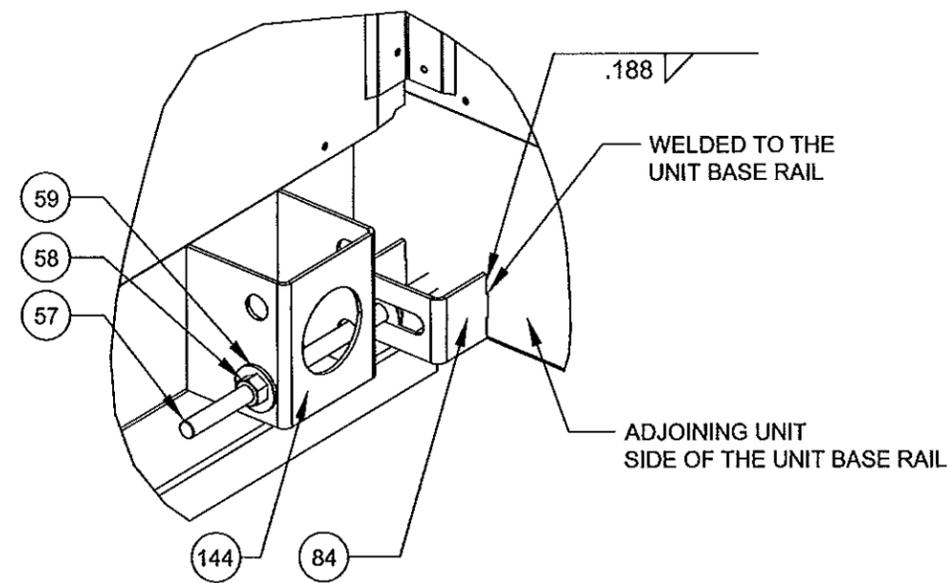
MULLION ASSEMBLY ATTACHMENT
